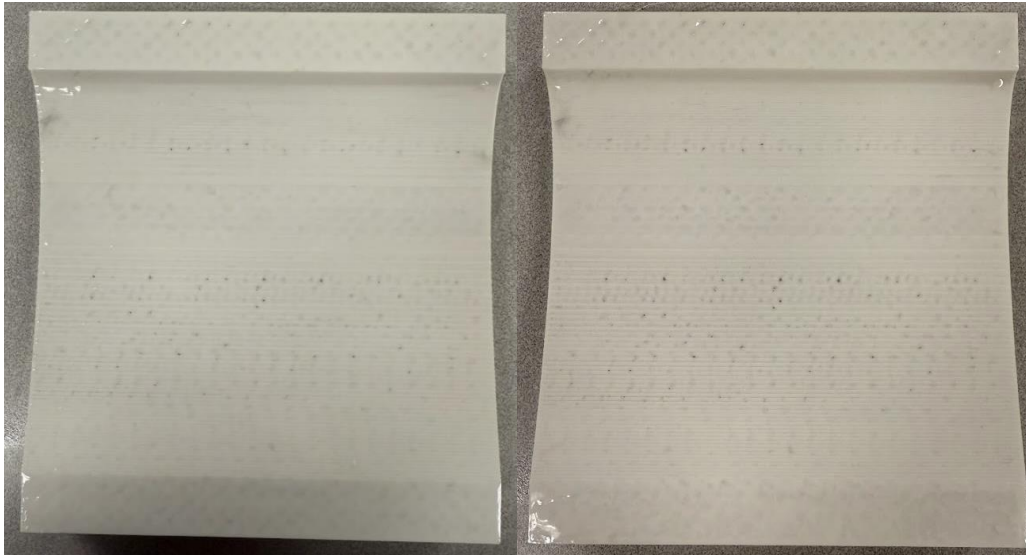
(Left) Unsanded Coated Mold (Right) Completely Sanded Coated Mold
